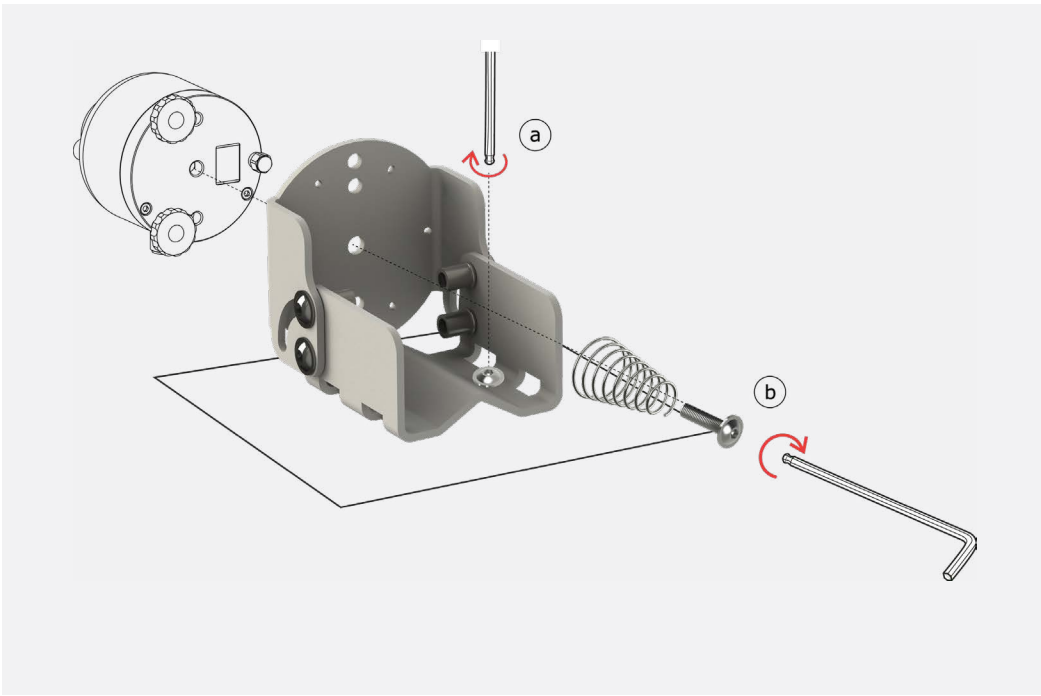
Installation of PMF01 on a surface, step 3.
